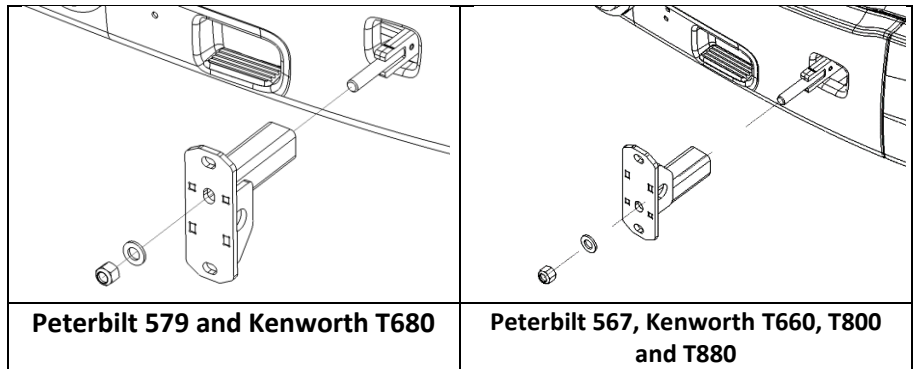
Mounting assembly for OEM bumper receiver holes (driver side shown).
